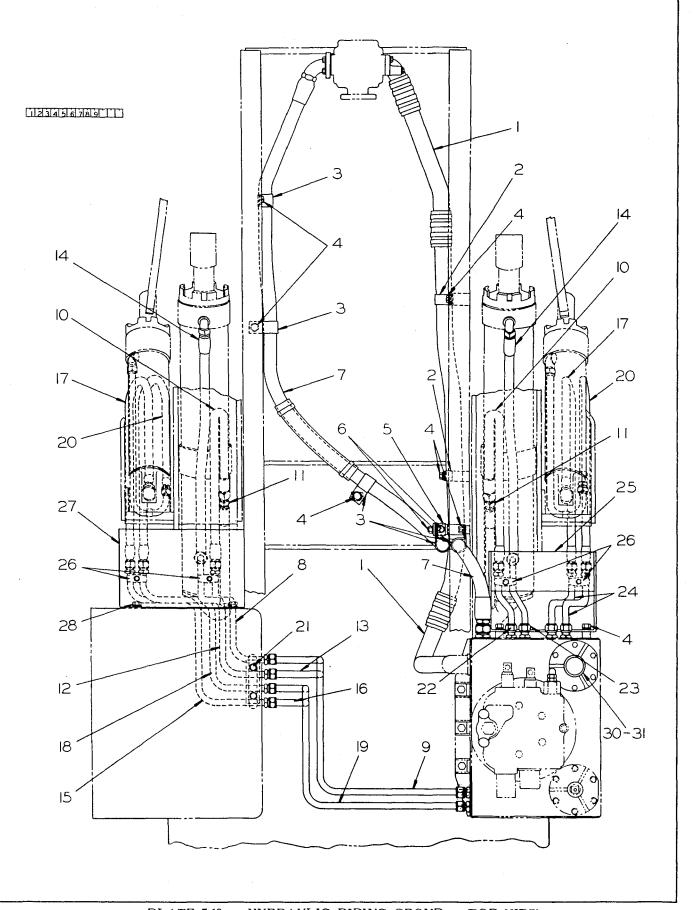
HYDRAULIC PIPING GROUP - TOP VIEW
